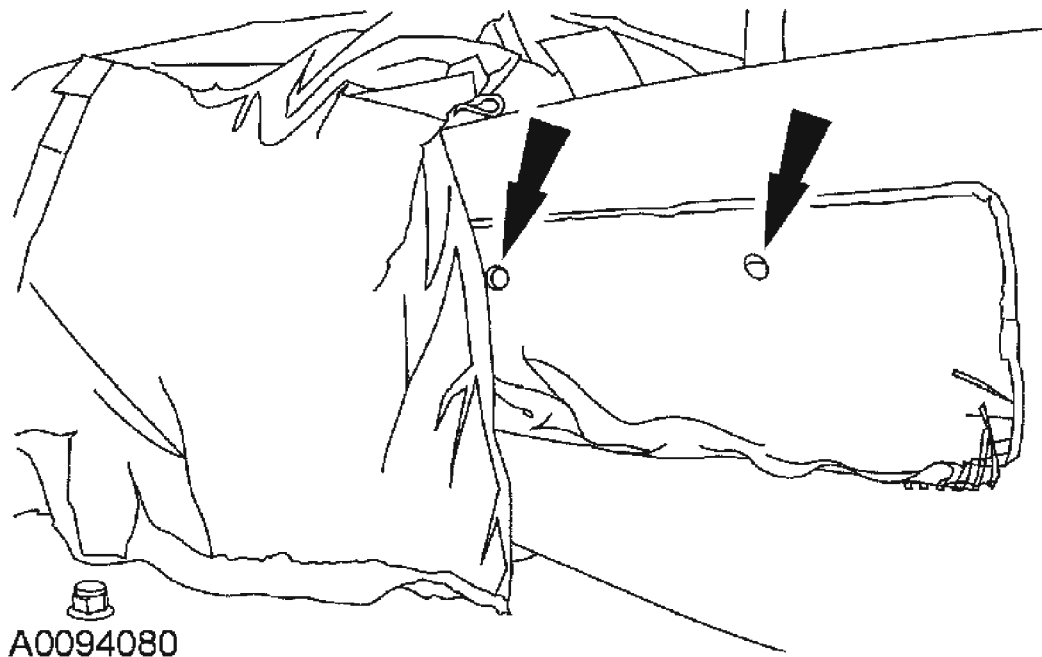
Aligning Holes In Side Air Bag Module Liner To Mounting Holes In Backrest Frame
